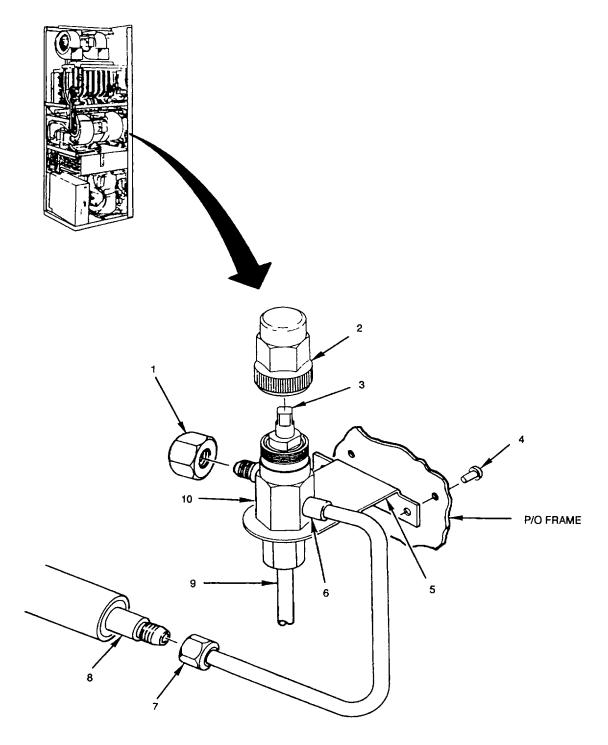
Damper Actuator Service Valve (V1) 5-59
